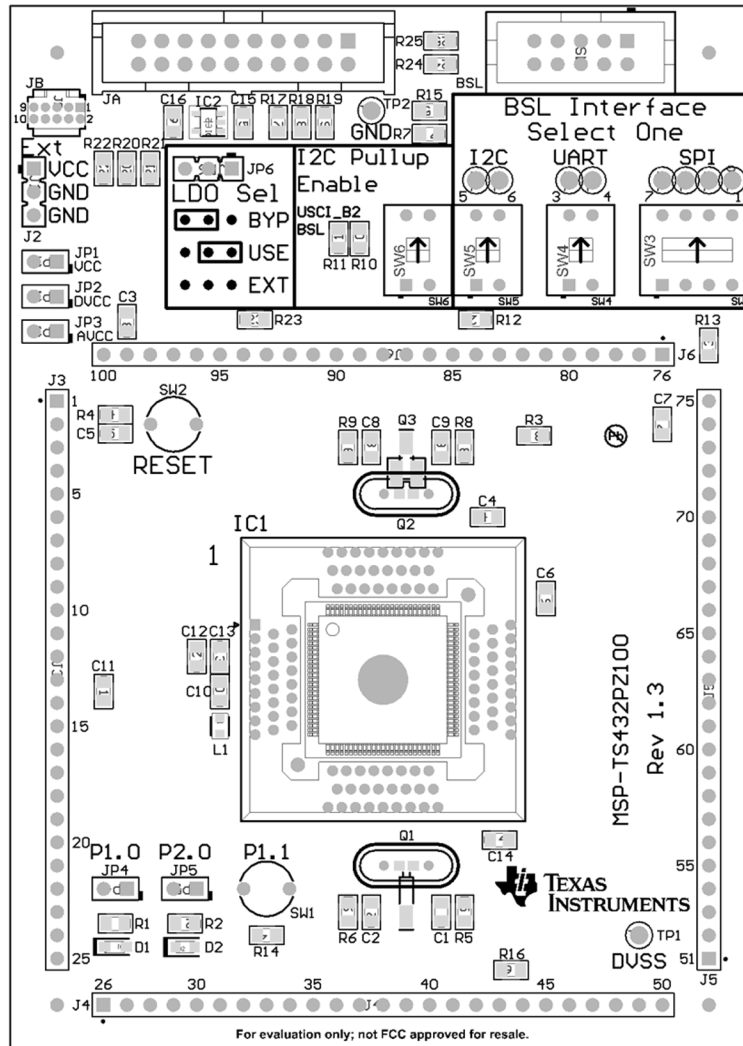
MSP-TS432PZ100 Rev 1.3 Target Socket Board, PCB
